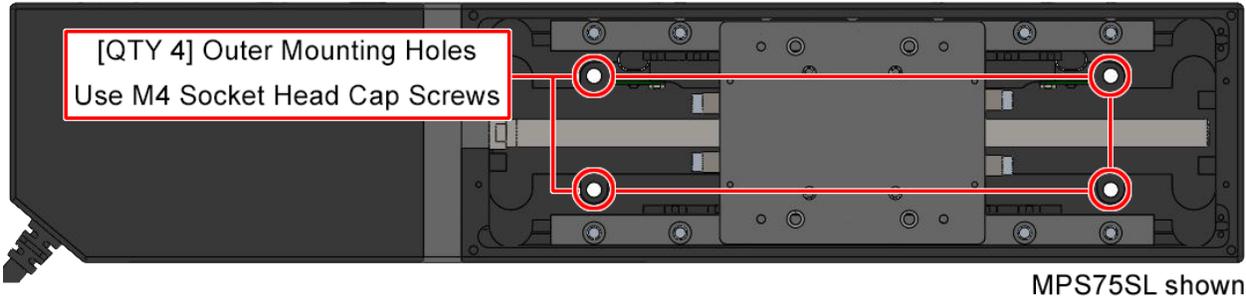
MPS75SL/SLE Mounting Hole Locations
